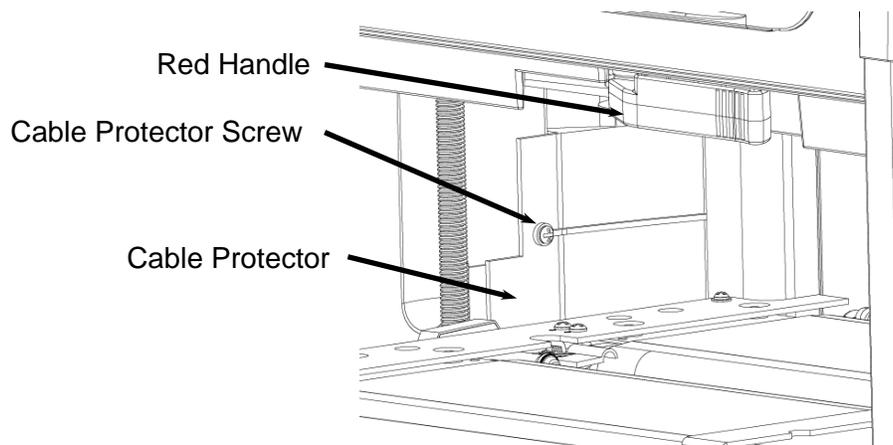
LOCATION OF THE HEAD CABLE PROTECTOR
